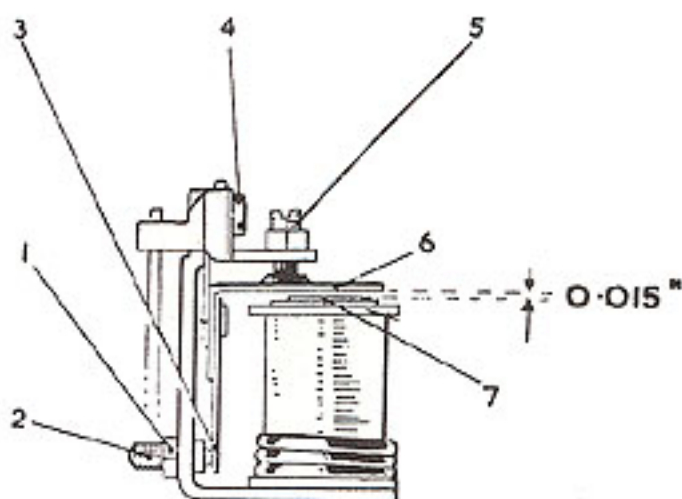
SETTING THE REGULATOR MECHANICALLY
